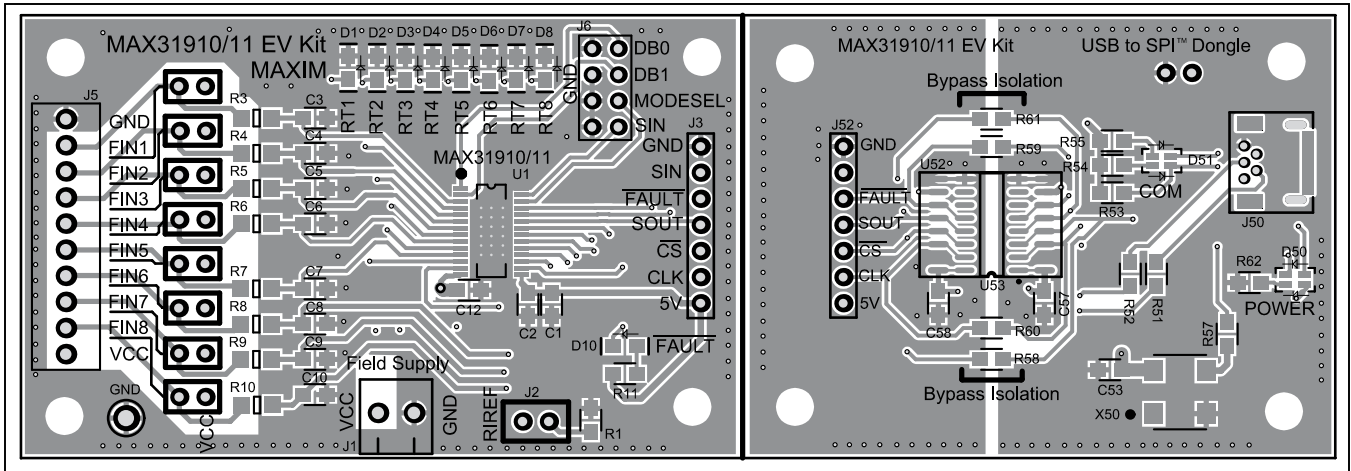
MAX31910/11 EV Kit PCB Layout—Top
